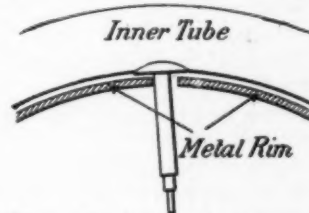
Showing necessity for care in adjusting dismountable rim.
